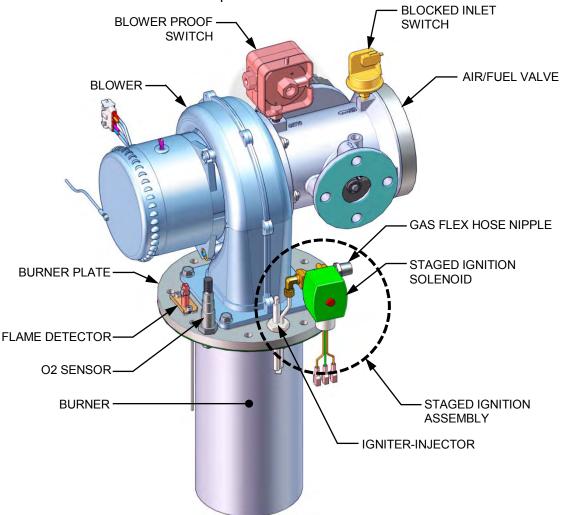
Benchmark Burner Assembly (Removed from Boiler)
